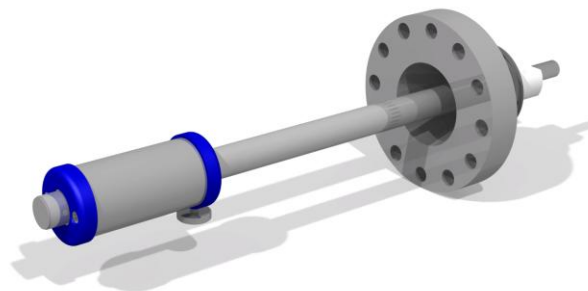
Follow the instructions of Fig 30 to Fig 33 backwards to reassemble the wobblestick. Refer to chapter 6.1 to align the magnets correctly.
